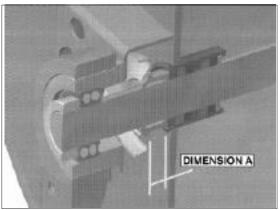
SECTION VIEW GENERAL ARRANGMENT
